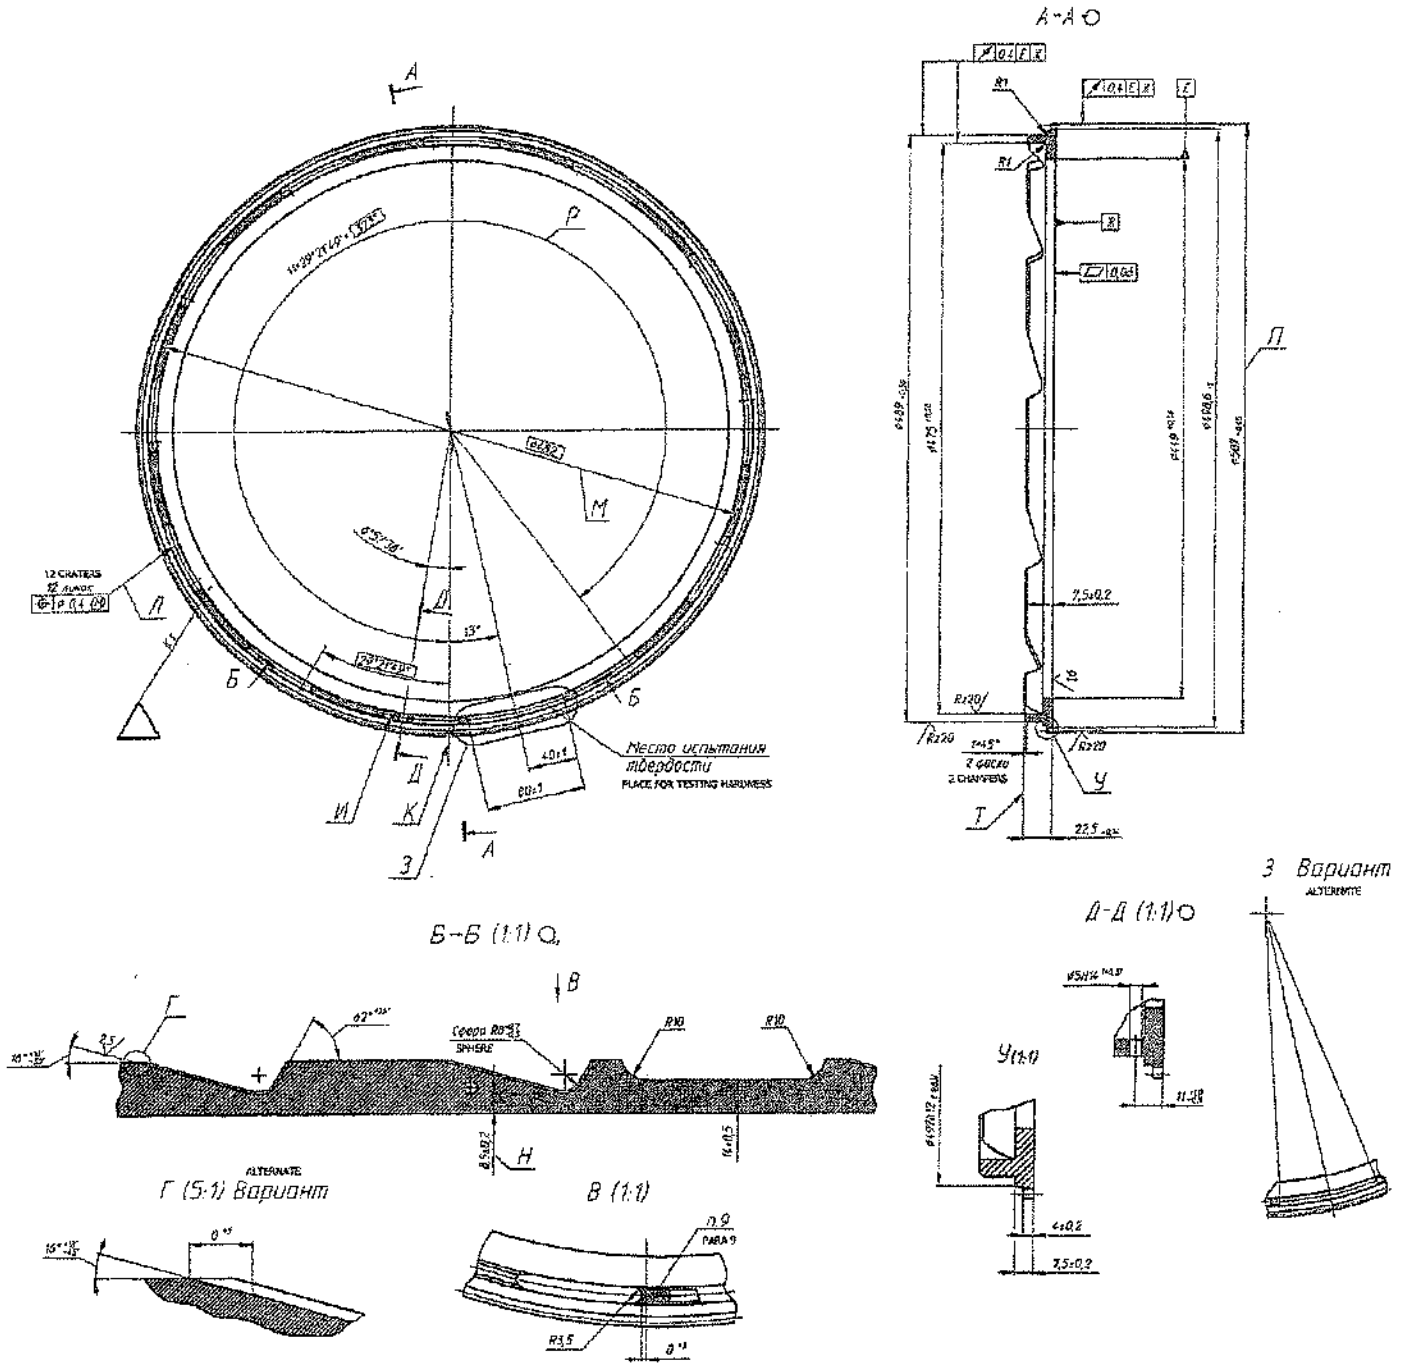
FIG: RIGHT HAND REAR ENGAGING RING TO DRG. NO 172.40.328
